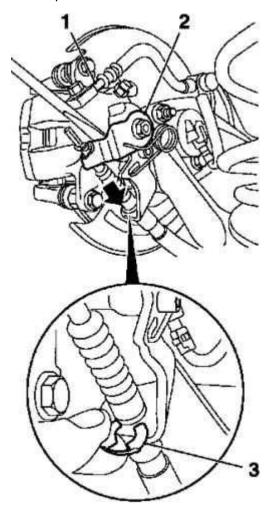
Withdrawal of the guide blocks: 1 - brake hose, 2 - lever, 3 - retention clamp
